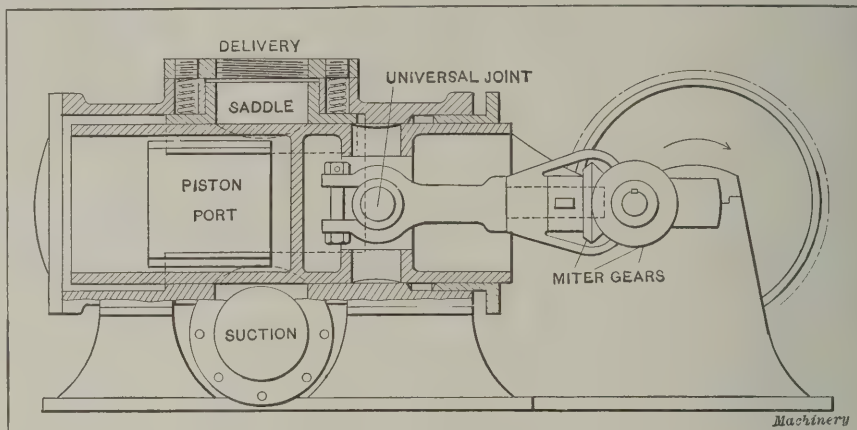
Sectional View of Valveless Pump of Horizontal Type
